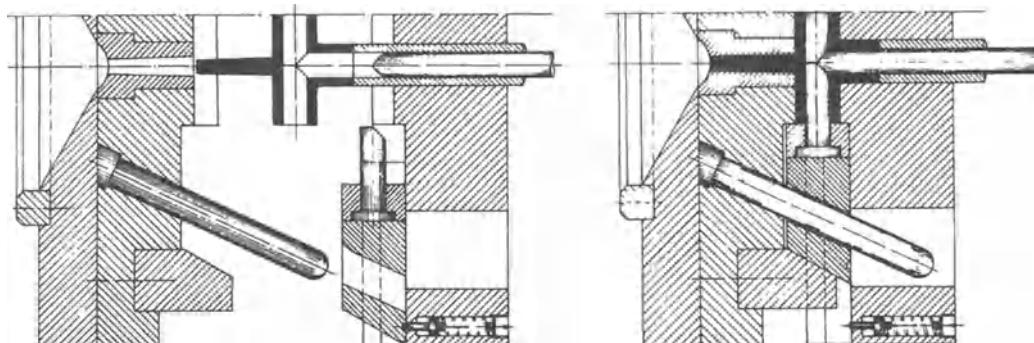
Schematic of mold with mechanically actuated side cores.
